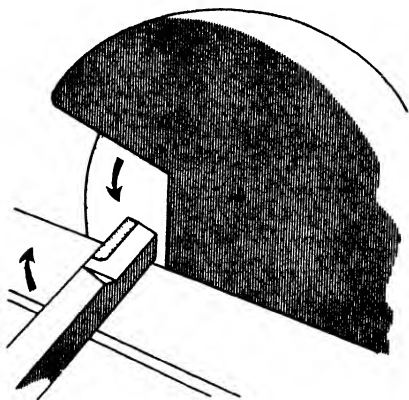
Proper Direction to Grind the Carbide Tip When Forming the Nose Radius
